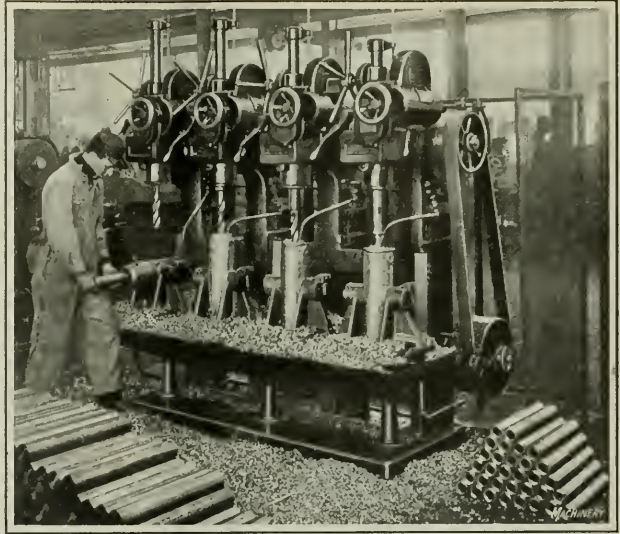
Drilling Spindle Sleeve Holes 17 1/4 Inches Long by 1 7/16 Inches in Diameter
